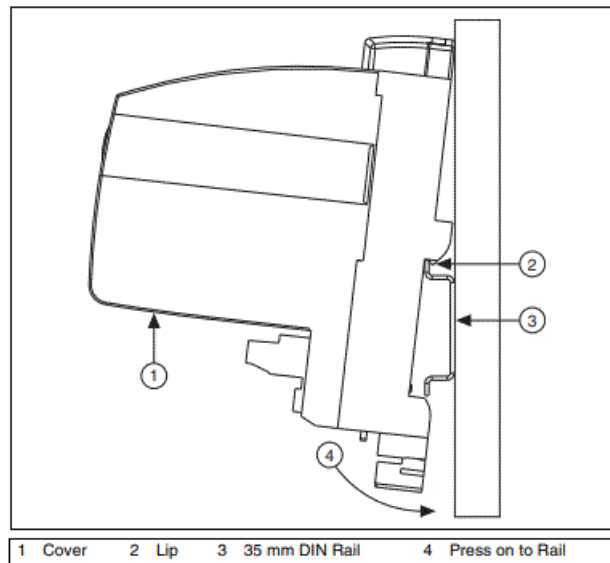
Mounting the FBUS-HSE/H1 LD on a DIN Rail
